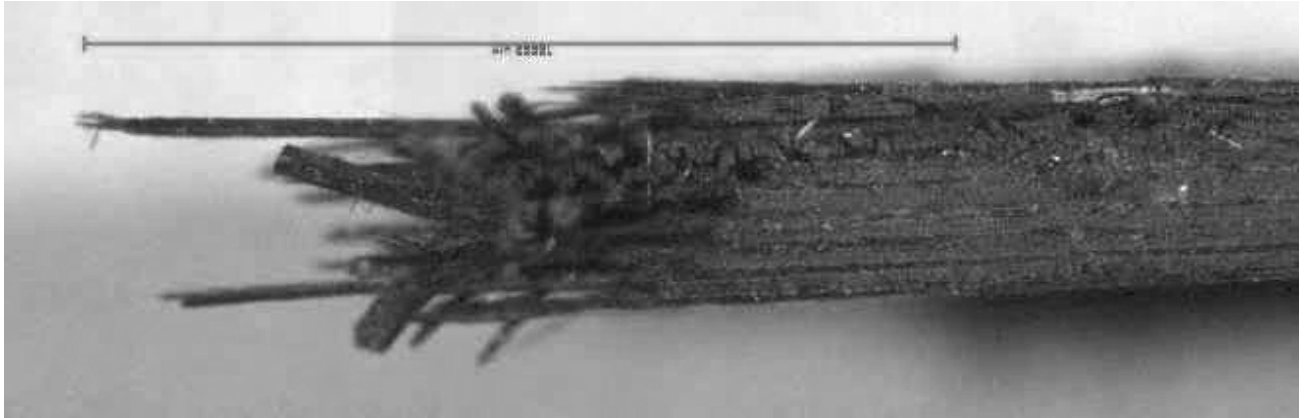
The bottom back side of the [0/90] IM7/ BMI 5250-4 specimen showing a close up view of the fiber fracture and pull out when subjected to tensile load to failure at 191°C
